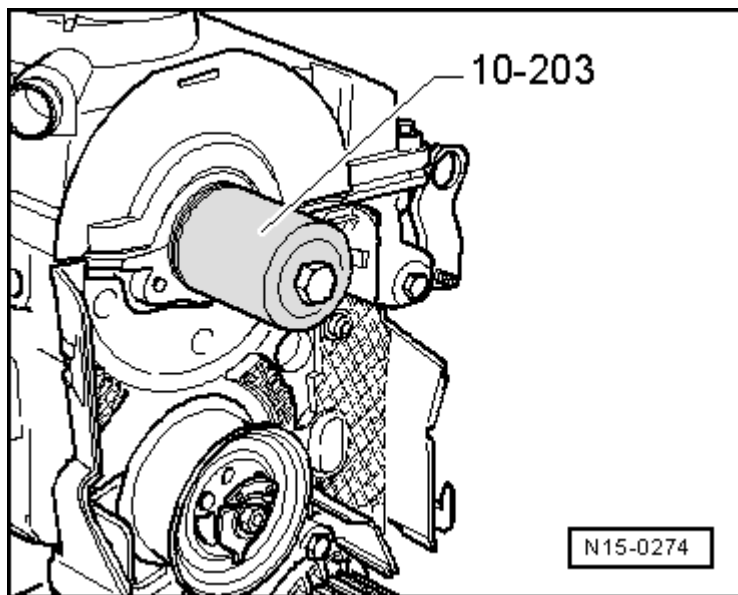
Identifying Seal Pressed In To Stop Using Seal Driver 10-203
